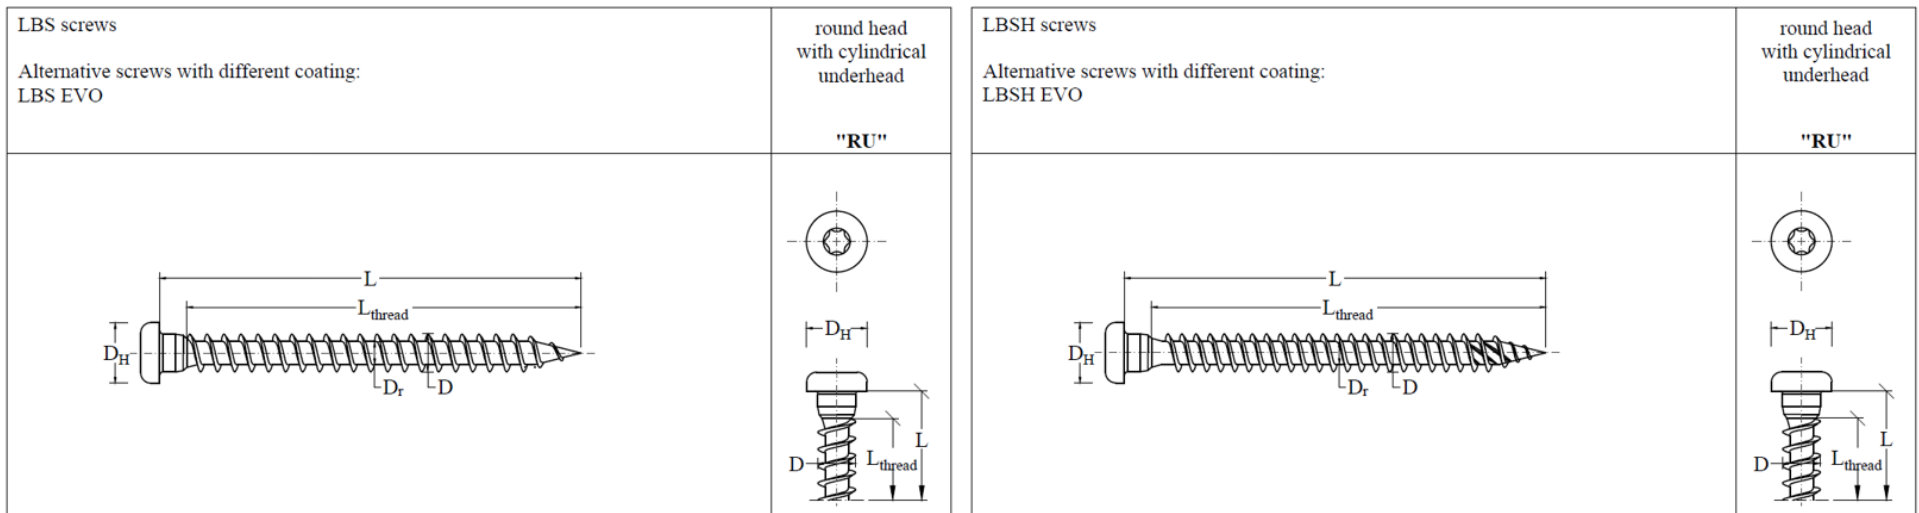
LBS AND LBSH FULLY THREADED SCREWS
